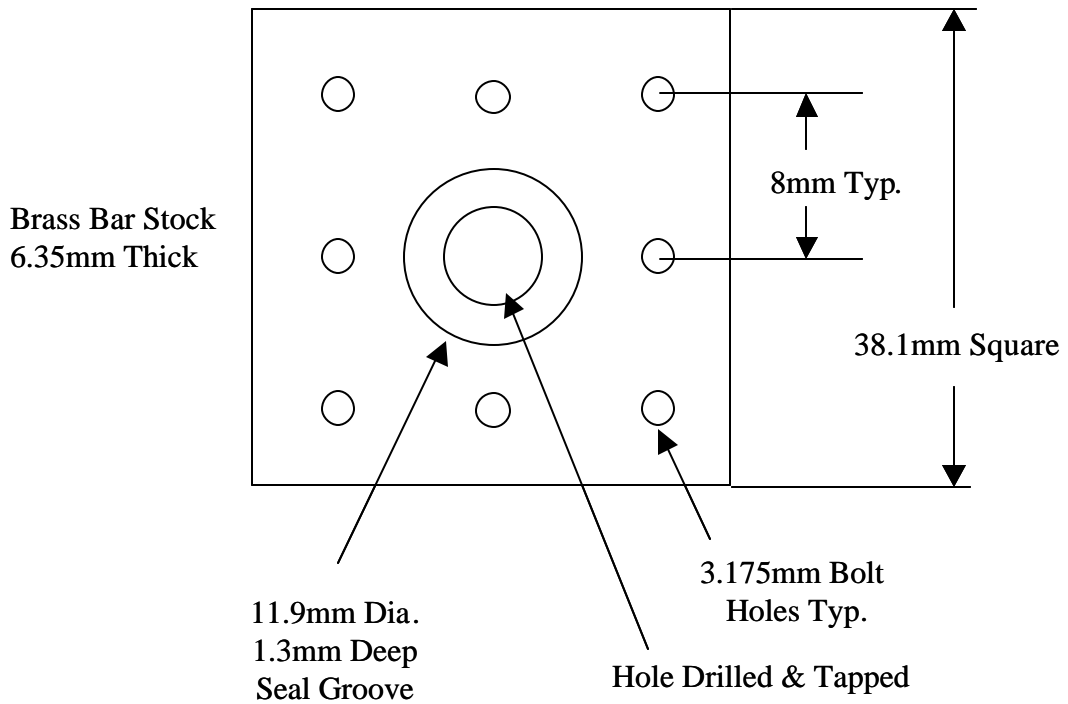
Brass Plate for Fastening Headers to Clear PVC Test Sections
